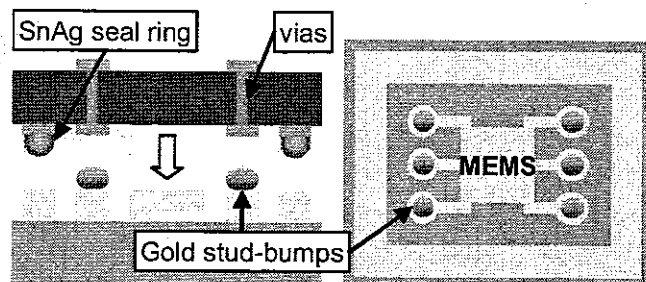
Schematic of a ceramic via lid with a solder seal ring and vertical feedthroughs. In this "hybrid" configuration, gold stud bumps were used for the bondpad interconnection instead of solder.
